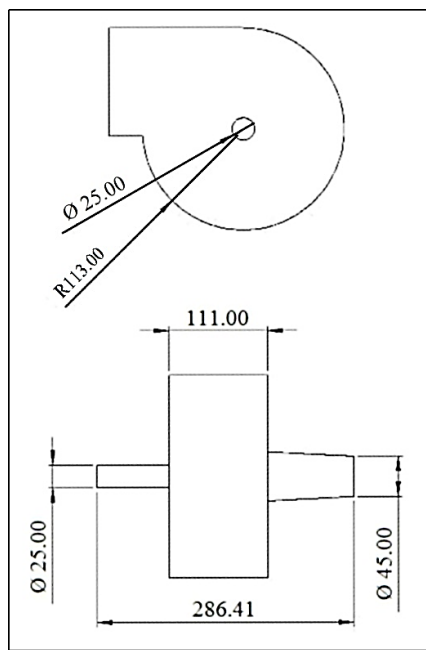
(c). Blower fan casing drawing (unit: mm)
